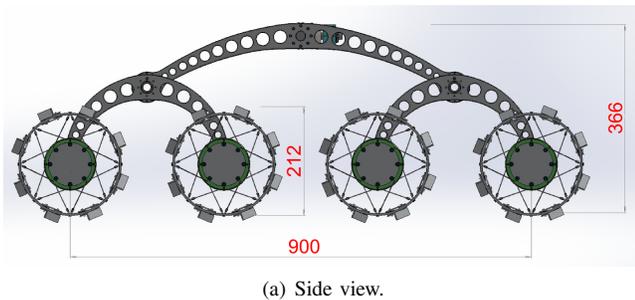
Side view on SEAR's drivetrain (Dimensions in mm).
